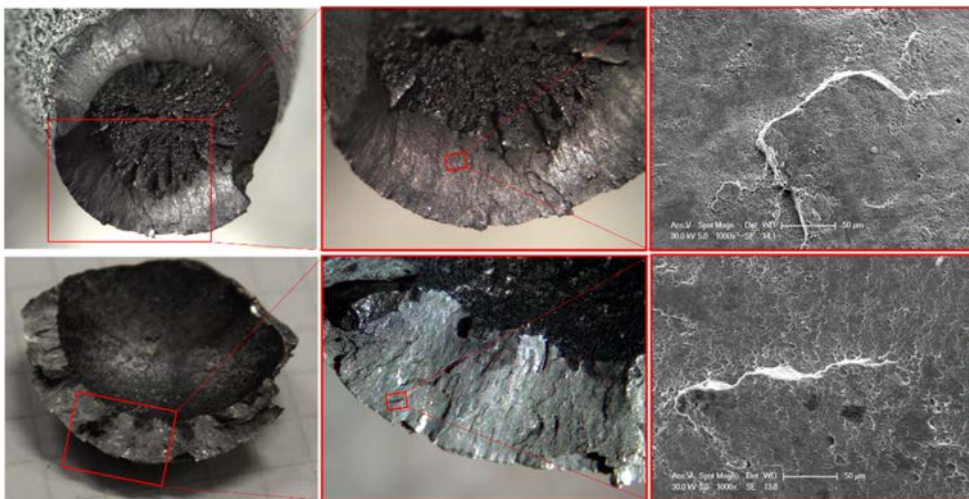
Fracture appearance of tensile sample and blast ejected cap for HHA steel showing shear fracture surfaces.
